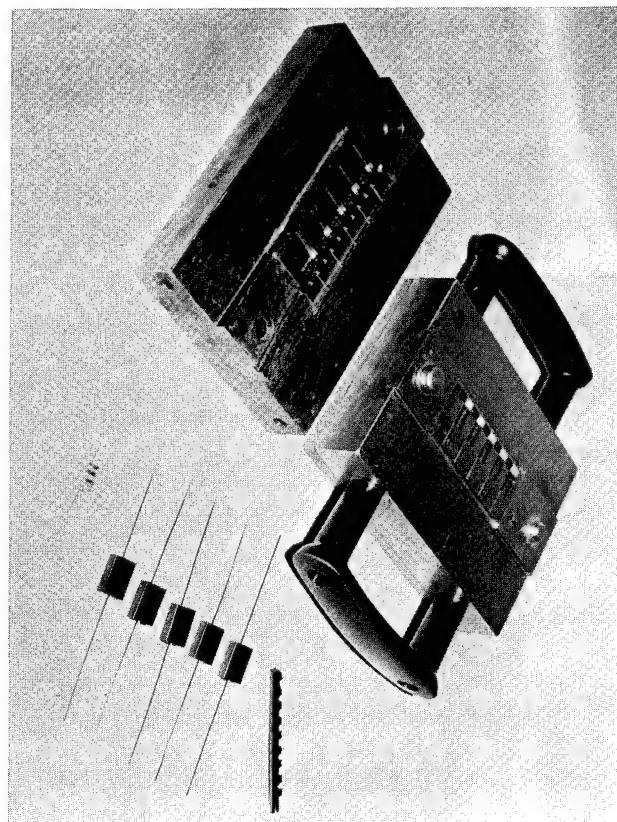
Mylar capacitors encapsulated in epoxy by liquid resin molding. Note modification to transfer mold runner to extend to edge of mold for parting line injection.
